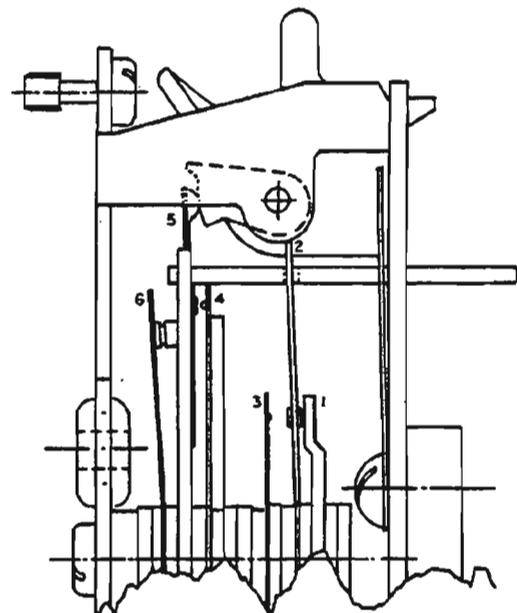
Coin Relay and Hopper Assembly, HD-550000-CR.
